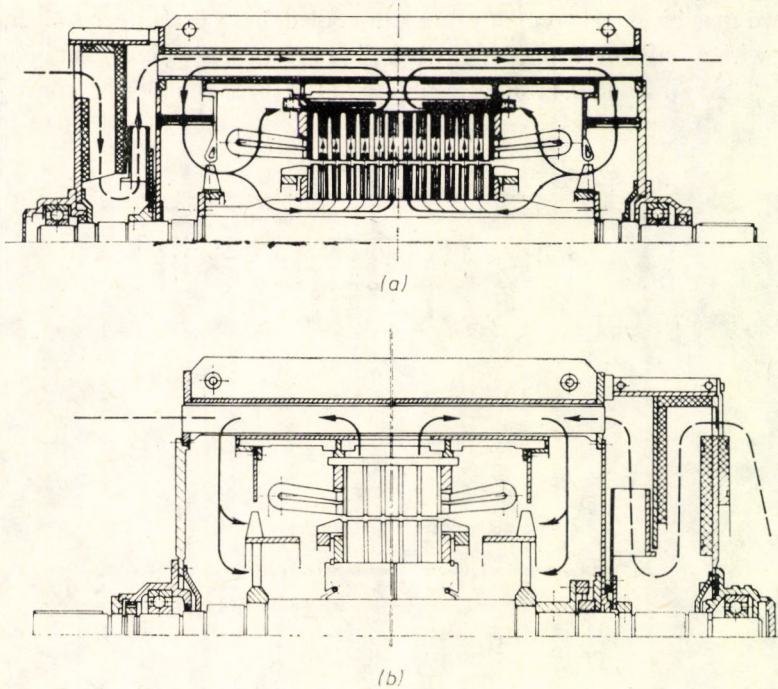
The cooling system of totally enclosed asynchronous machines with air-cooled heat exchanger and axial-flow internal fan: (a) two-side cooling with axial-flow fan, (b) two-side cooling with axial-flow fan on tube
